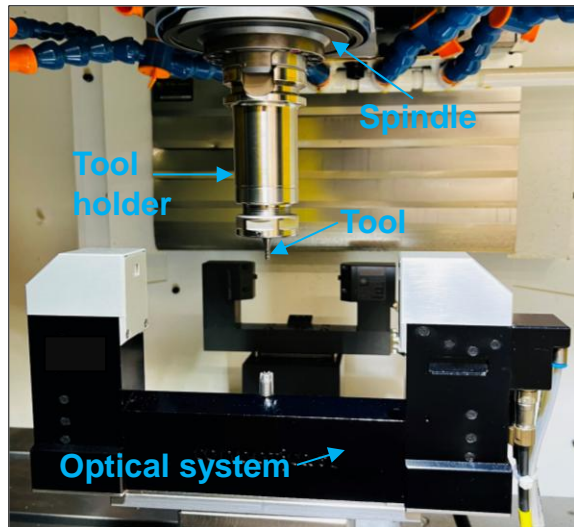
A photograph of the camera-based system with $\varnothing 3$ mm radius end mill mounted in the spindle of the machine tool.
